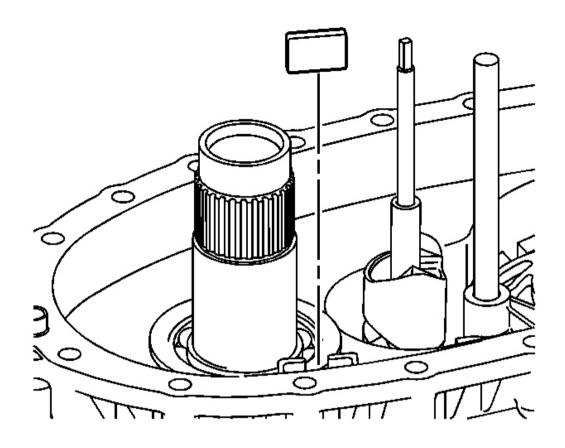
View Of Magnet Courtesy of GENERAL MOTORS CORP.
